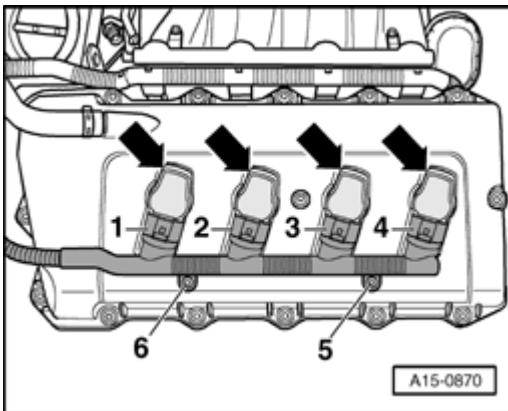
Removing Bolts On Right Cylinder Head, Disconnecting Electrical Harness Connectors & Removing Ignition Coils
